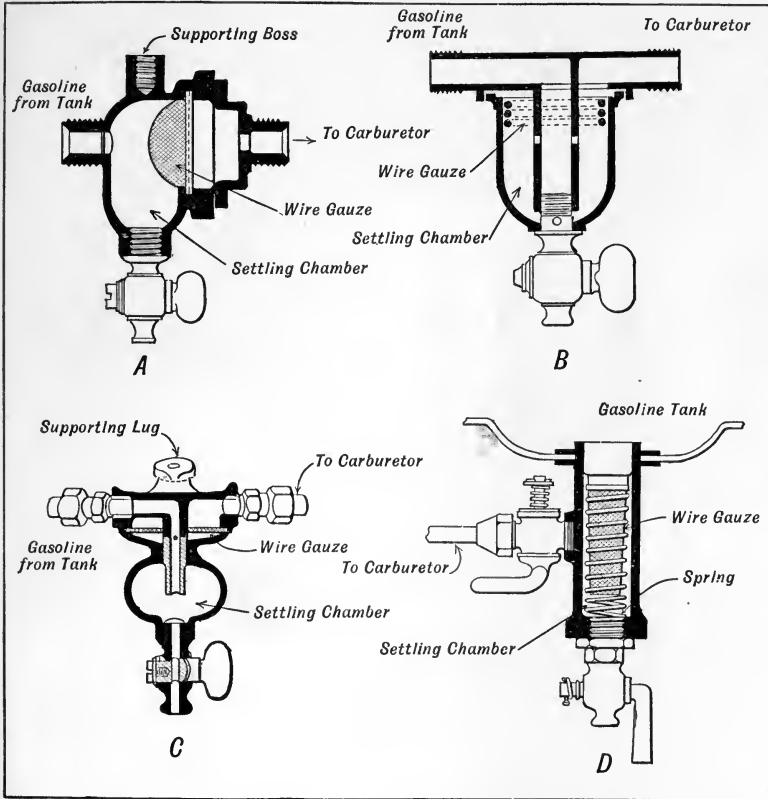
Types of Strainers Interposed Between Vaporizer and Gasoline Tank to Prevent Water or Dirt Passing Into Carbureting Device.
